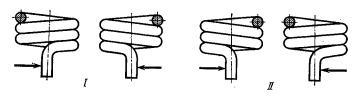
Hand of coils and disposition of ends in helical torsion springs
